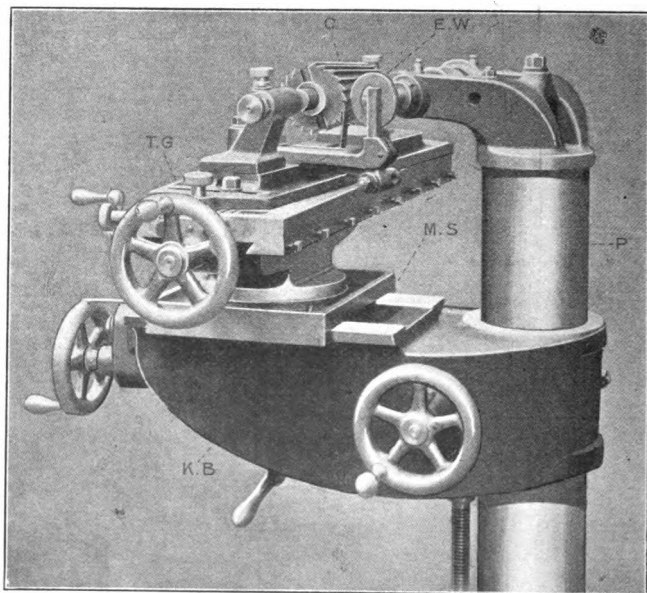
"Ward" Cutter Grinder. Sharpening a Taper Milling Cutter.
